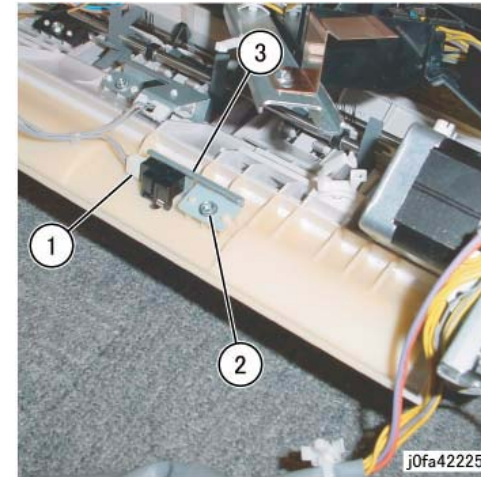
Removing the Finisher Entrance Sensor Assembly (j0fa42225)
